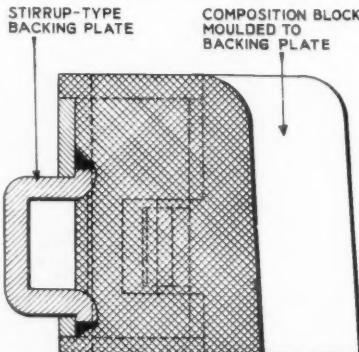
Cross section through a composition brake block, showing the stirrup arrangement
